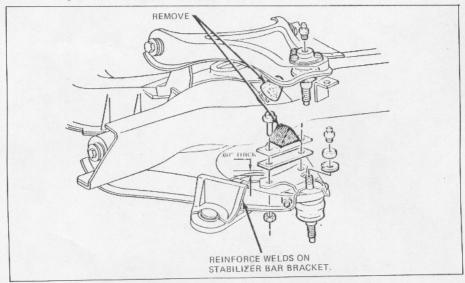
Reinforce welds on stabilizer bar bracket and remove the upper /lower bumpers.
